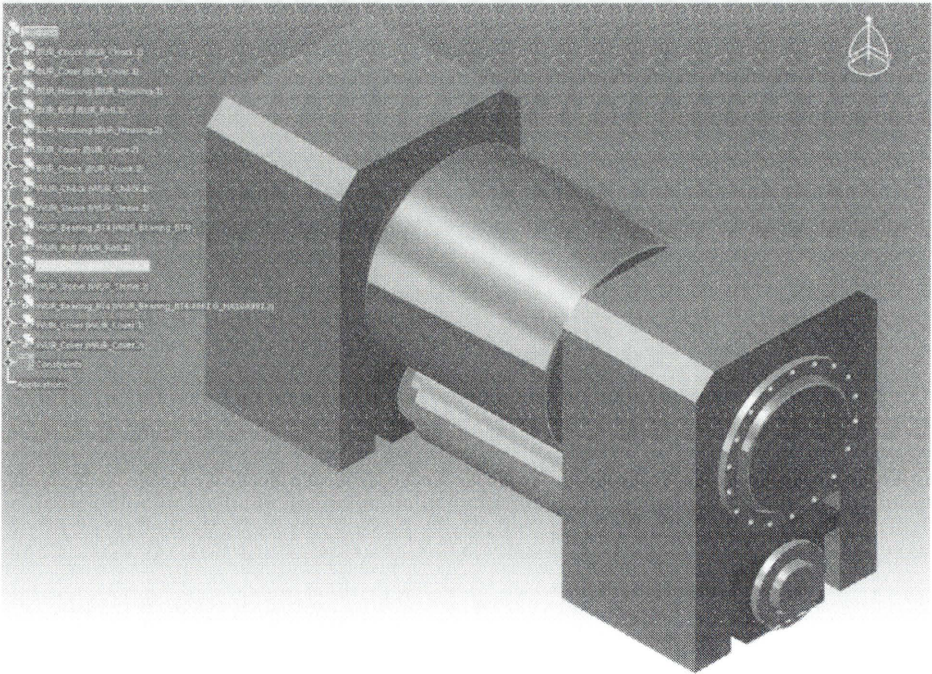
Perspective view of the upper rolling stand in cold rolling mill
